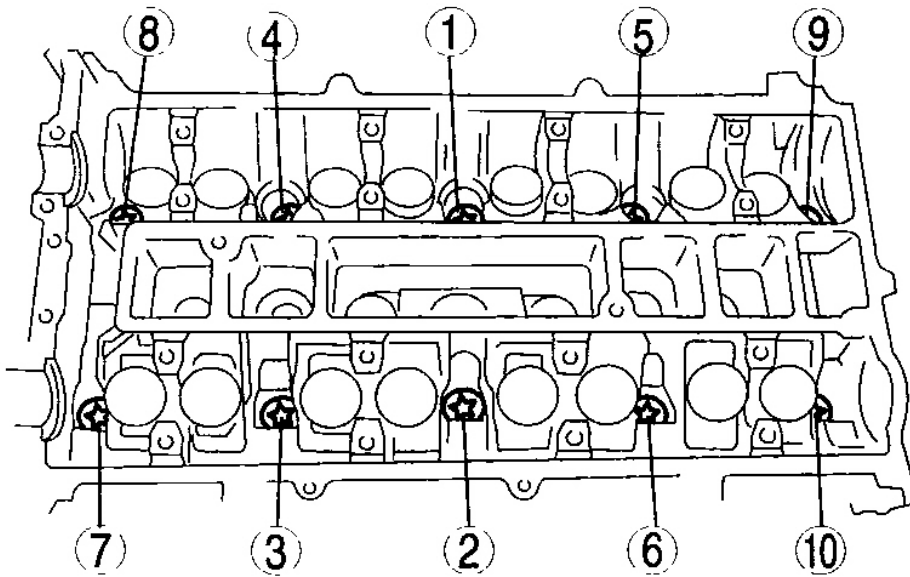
Assembling Cylinder Head (II) & Torque Specification
